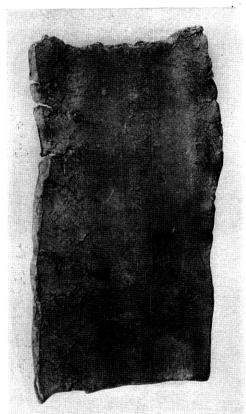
View of piece of old cable sheath made of commercially pure lead, which failed in service from intercrystalline fracture.
